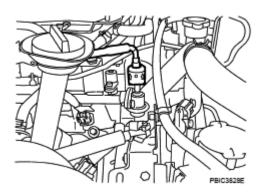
Identifying Fuel Feed Hose Quick Connector
